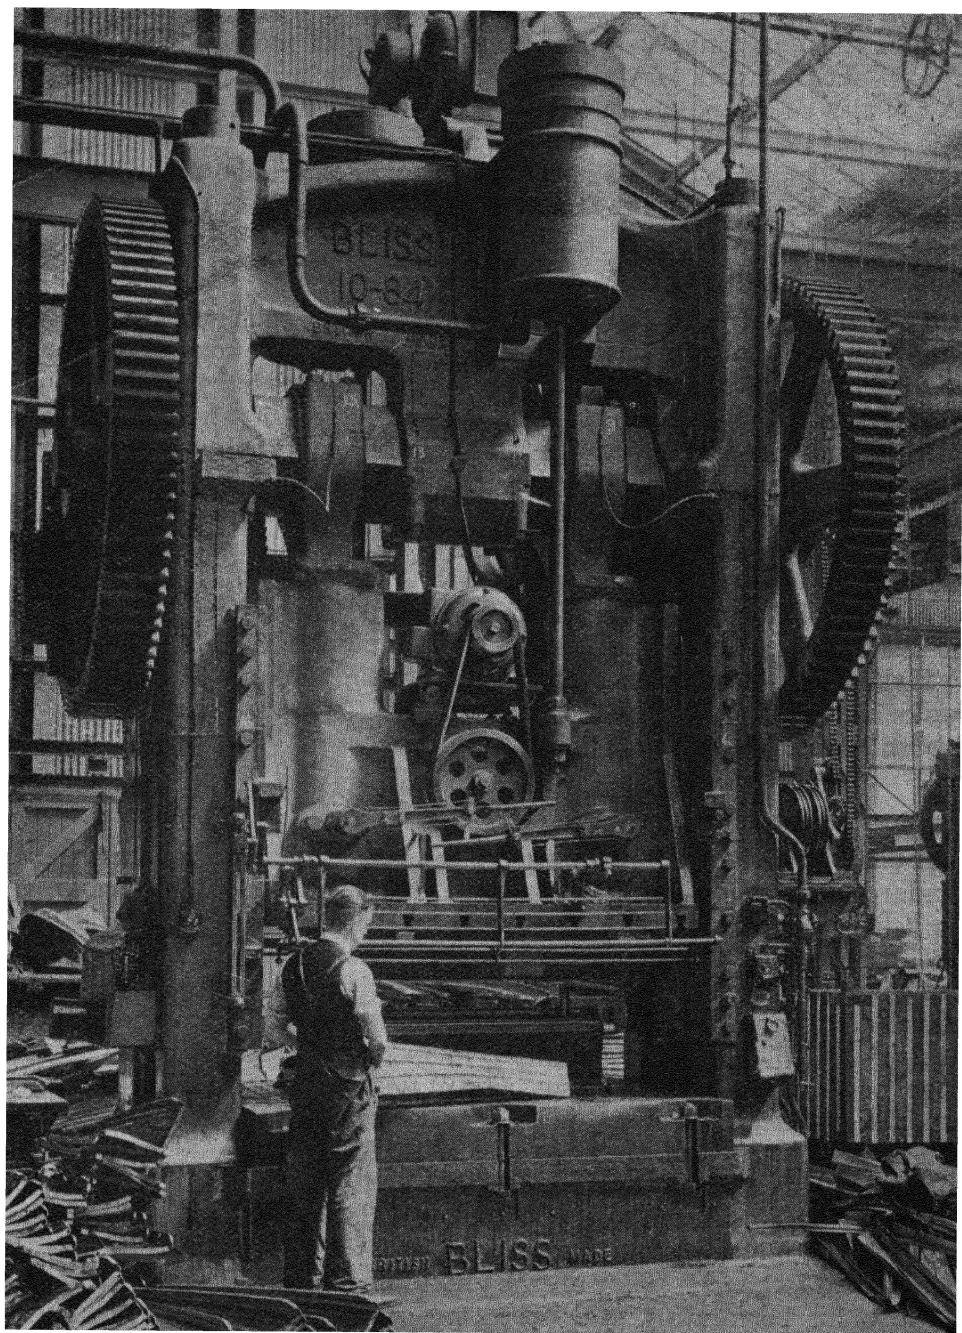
DOUBLE-CRANK SINGLE-ACTION PRESS MANUFACTURING MOTOR-CAR RUNNING BOARDS
